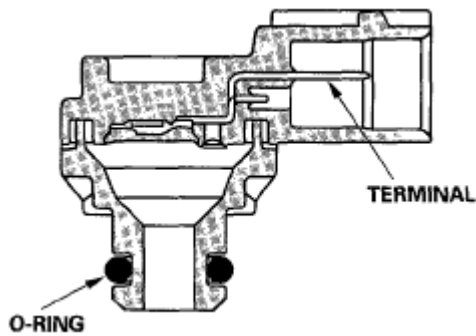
Identifying Terminal And O-Ring Of Manifold Absolute Pressure Sensor
